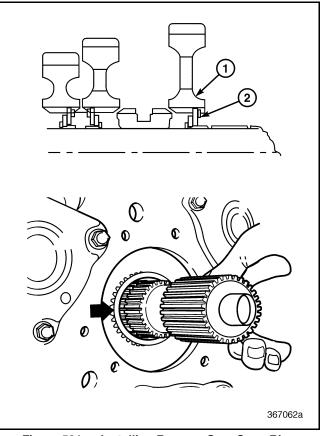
Installing Reverse Gear Snap Ring (T313L/T318L Shown)
